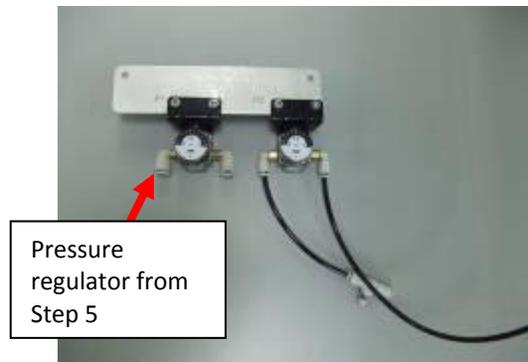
Installing the Pressure Regulator sub- assembly which has been removed in Step 5
